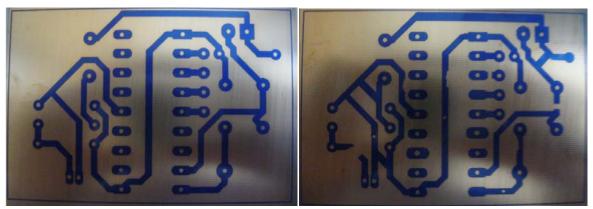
(a) A template bare PCB image, (b) A defective bare PCB image
